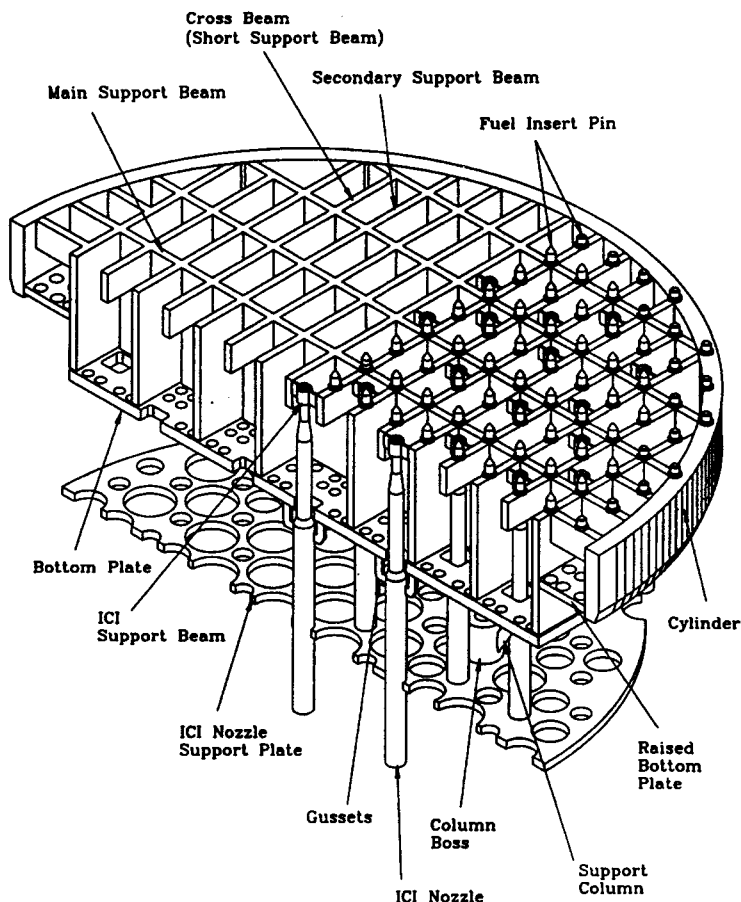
Lower Support Structure and ICI Nozzle Assembly
